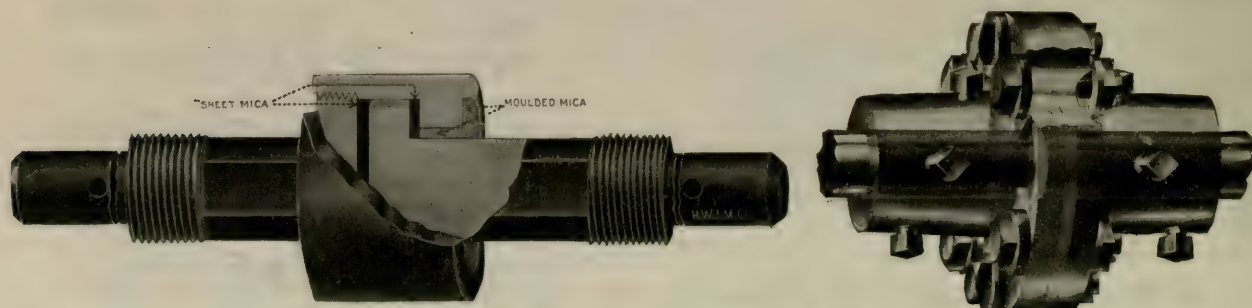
Pipe Line Insulation. H. W. Johns-Manville Company. Fig. 3690. Axle Insulation for Hand Cars. Railroad Supply Company.
